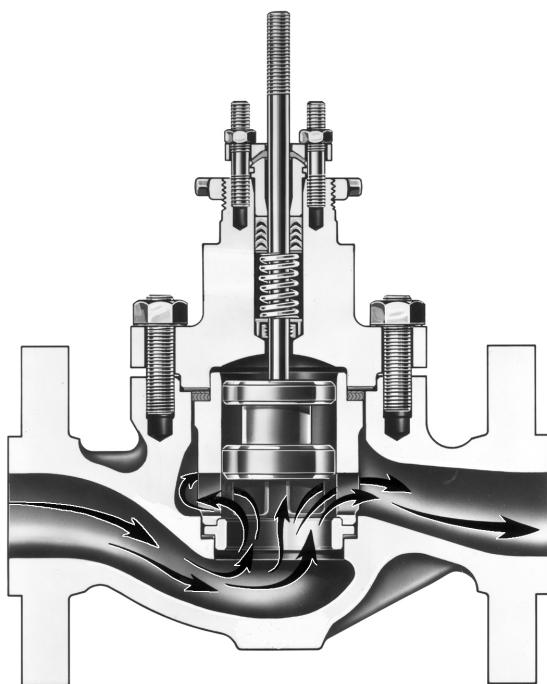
Cross-section of a globe valve body assembly with an unbalanced plug. Courtesy of Fisher-Rosemount.
